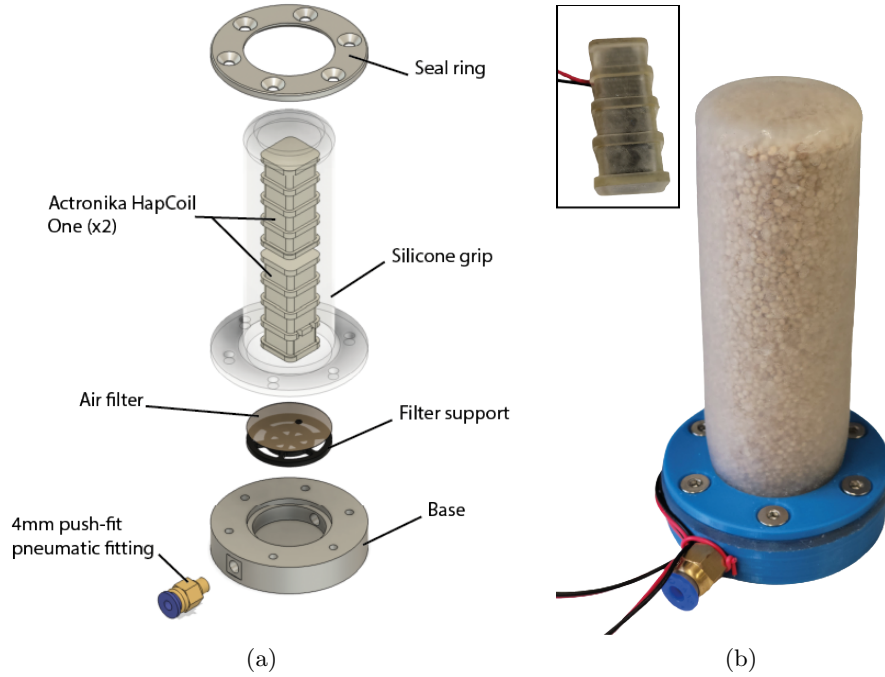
(a) Exploded CAD model showing the construction of the multimodal haptic joystick. (b) Figure: The prototype joystick. Insert: The Actronika Hap-Coil One LRA with ribbed enclosure.
